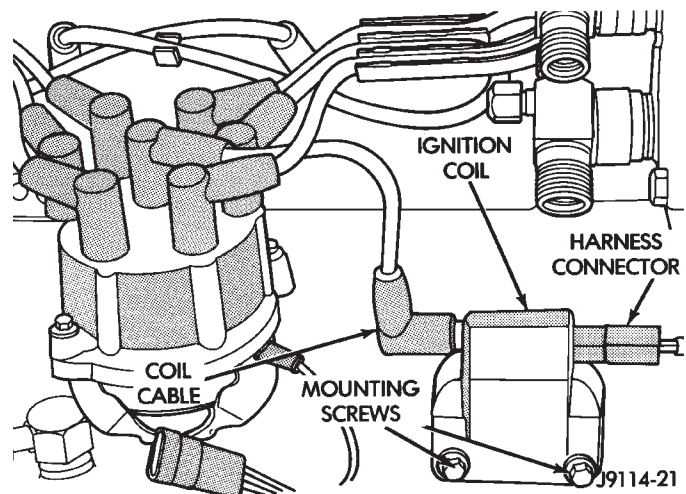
Coil Harness Connector—Typical (4.0L Shown)
